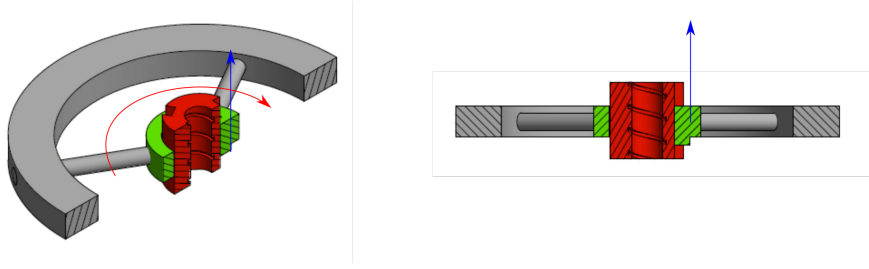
Image of cross-section of linear screw mechanism CAD design.
